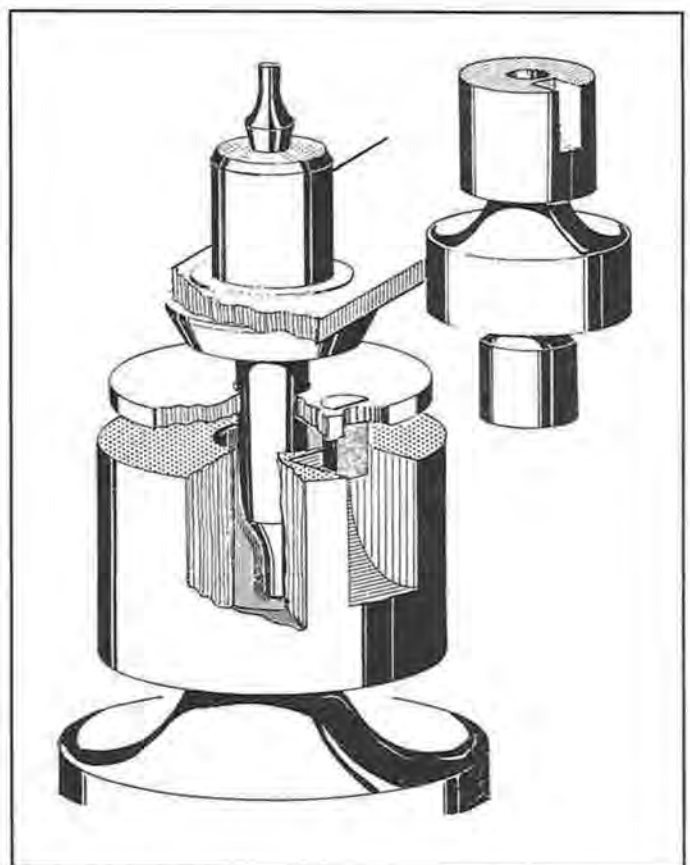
This stump is used to stake on single rollers and lower part of two-piece rollers.
